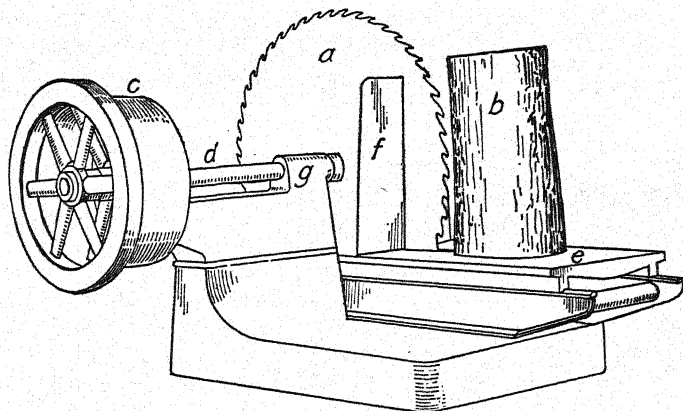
Heading saw. *a.* Circular saw. *b.* Bolt of wood. *c.* Pulley. *d.* Shaft or arbor. *e.* Carriage. *f.* Guide. *g.* Bearing. (*Courtesy of Defiance Machine Works.*)
